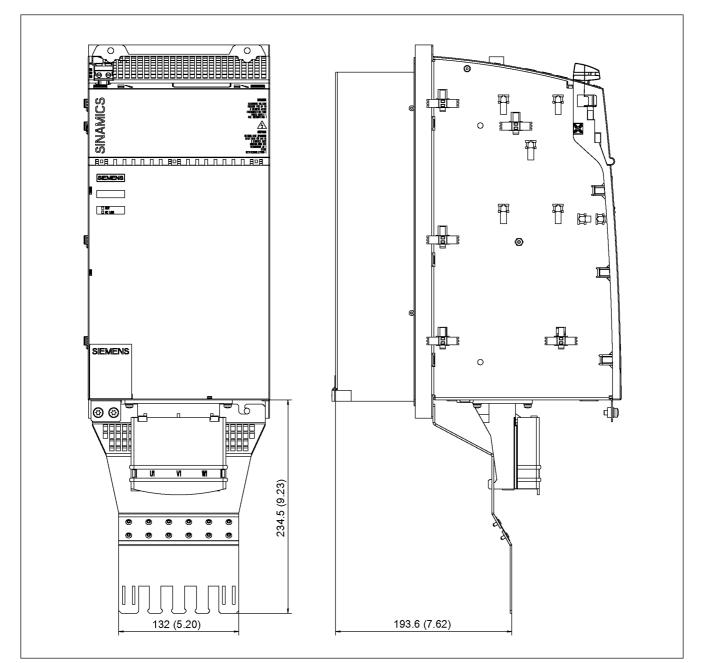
Dimension drawing of shielded terminal plate on a 200 mm module with external air cooling
